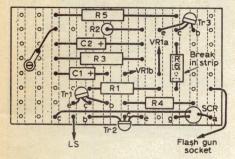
The component layout, on Veroboard. The long wire connecting to the SCR cathode should be sleeved.
